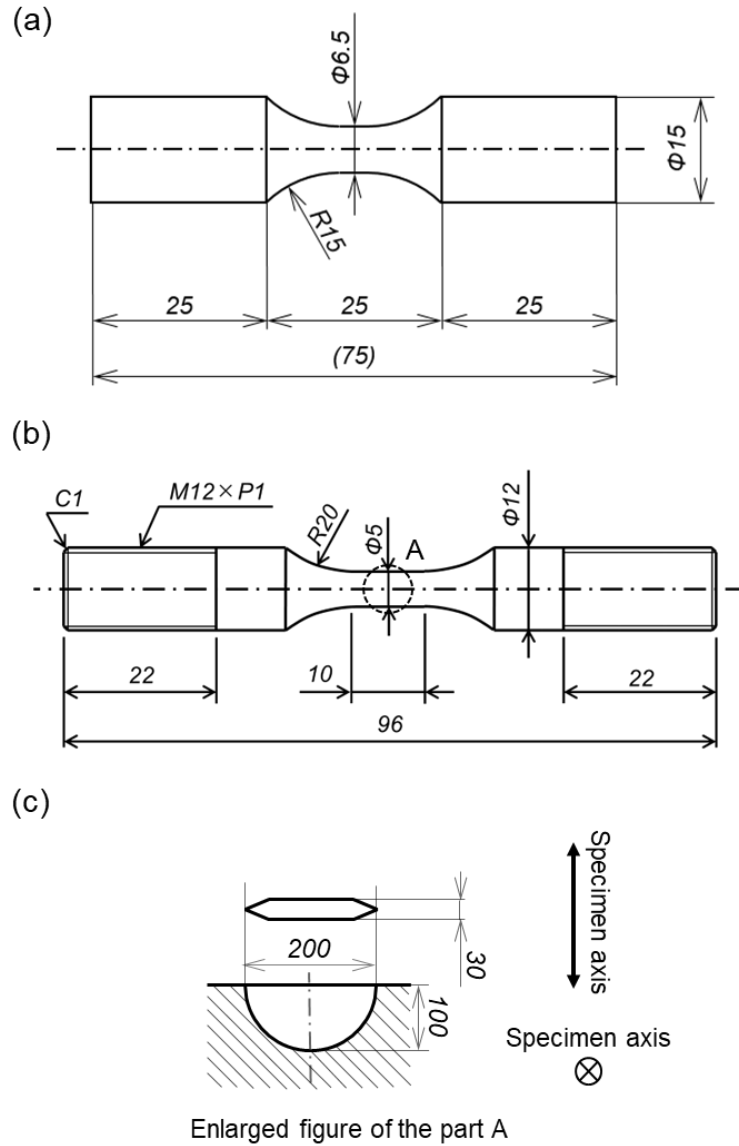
Shapes and dimensions of: (a) torsional fatigue test specimen (in mm); (b) EDM-notch specimen for the push-pull fatigue tests (in mm); (c) small, semicircular EDM notch (in μm).
